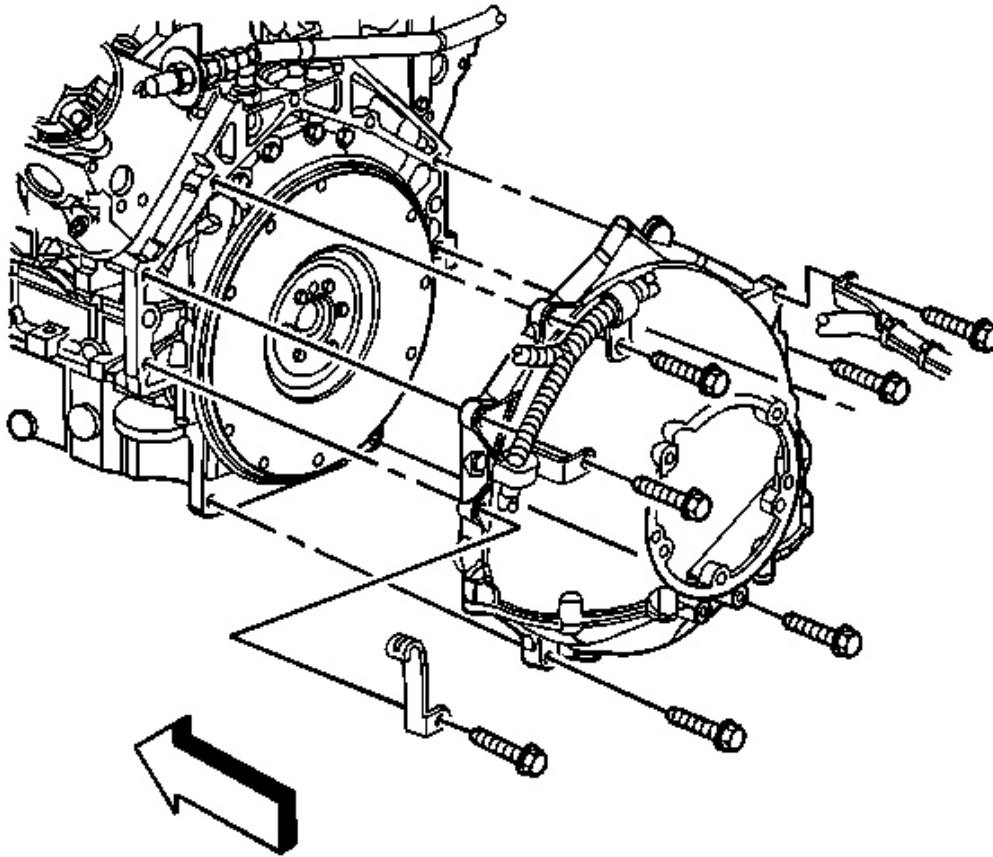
Bottom Flywheel Housing-To-Oil Pan & Bolts
